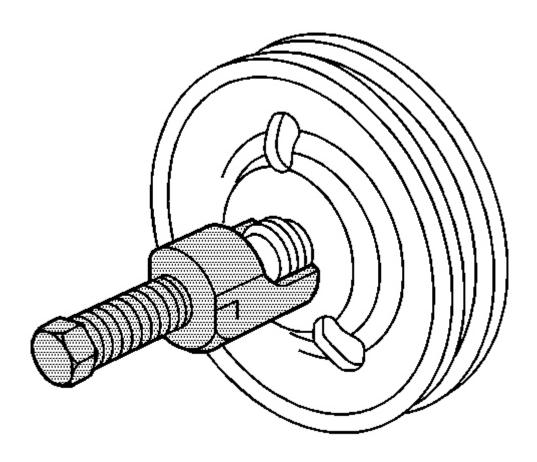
View Of Power Steering Pump Pulley Remover Courtesy of GENERAL MOTORS CORP.
